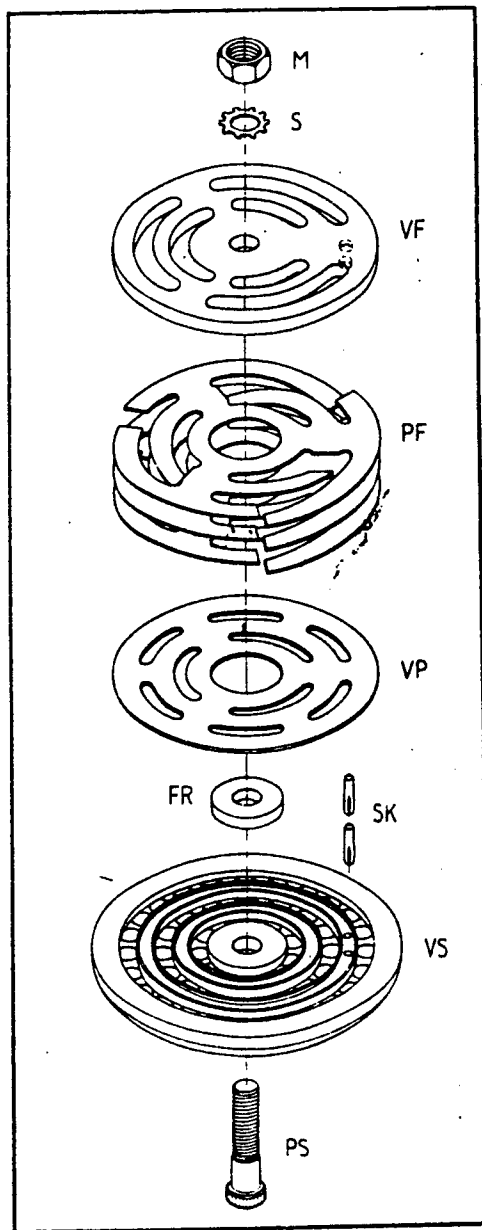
Compressor valve. M nut; S fan washer; VF valve guard; PF plate springs; VP valve plate; FR guide ring; SK notched pins; VS valve seat; PS precision bolt.
